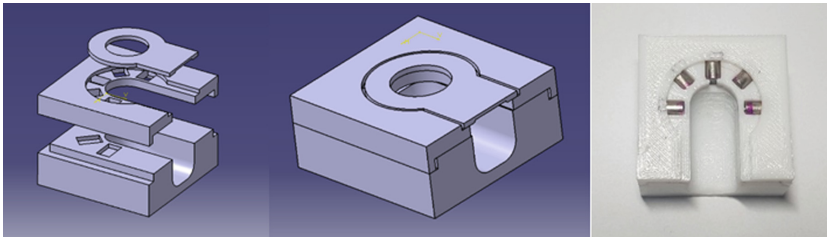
3D CAD modeling of one of test bed (left and middle), and test bed made by 3D printer (right)
